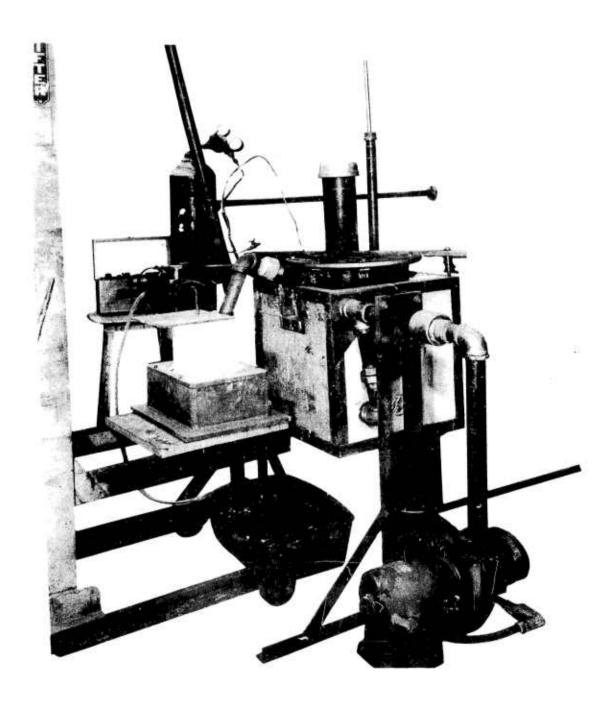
Magnesium-Lithium Furnace showing Mold in position preparatory to pouring
